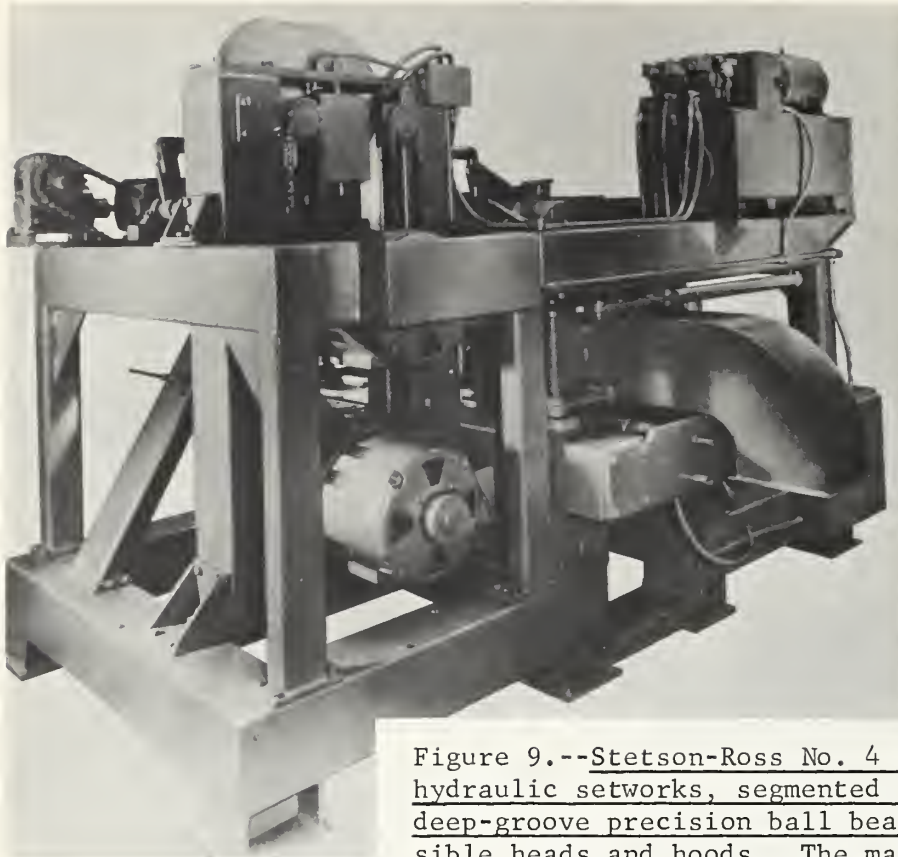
Stetson-Ross No. 4 four-head Beaver with hydraulic networks, segmented cutterheads carried in deep-groove precision ball bearings, and easily accessible heads and hoods. The machine will accept logs up to 24 inches in diameter. Nominal feed speed is 183 f.p.m. (Stetson-Ross photo).
